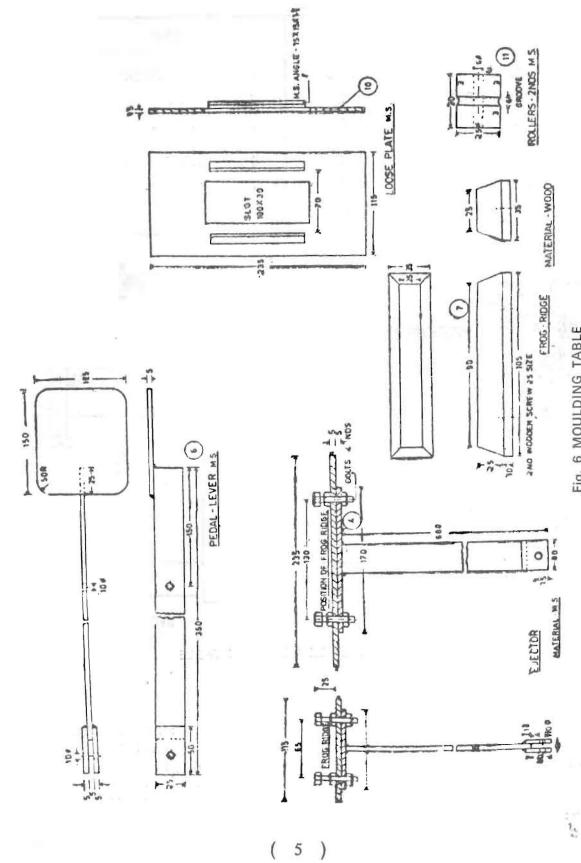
MOULDING TABLE Note: Dimensions of all bolts are 10  $\phi$  37 Length
